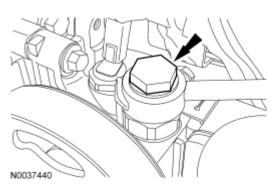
Locating Power Steering Pressure (PSP) Tube Bolt Courtesy of FORD MOTOR CO.
